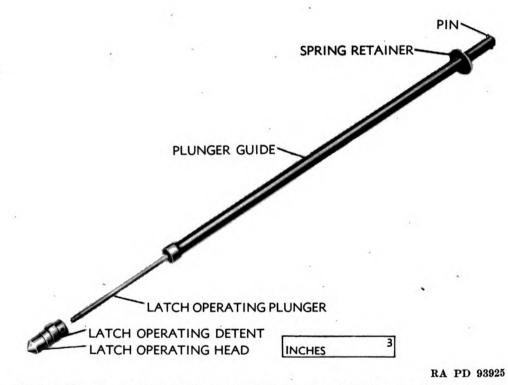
20-mm hydraulic charger M5-Parts of latch operating assembly.
